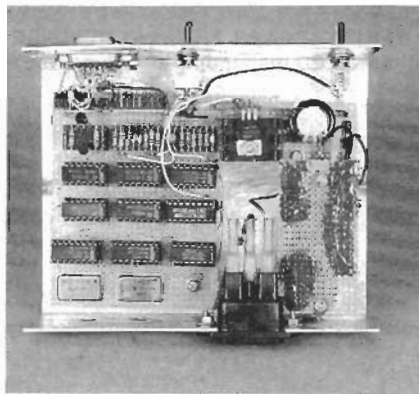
THE AUTHOR'S PROTOTYPE. Perforated construction board and wire-wrap techniques were used to assemble the project.
